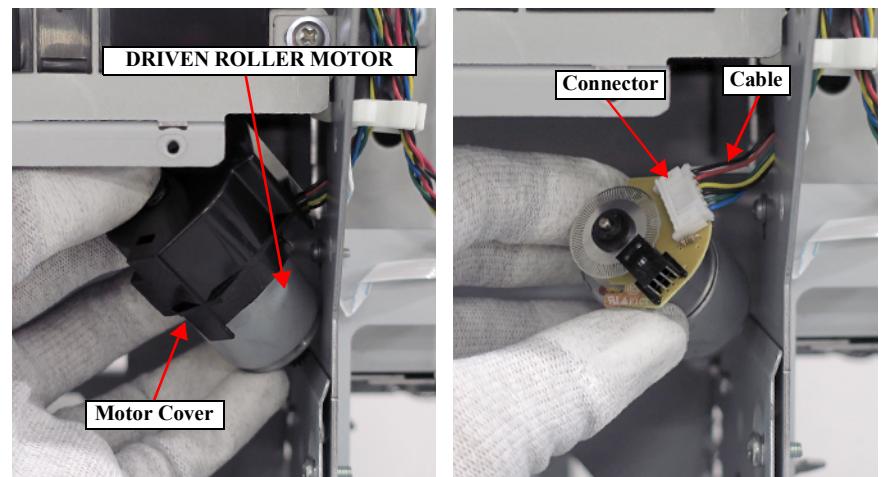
Removing the DRIVEN ROLLER MOTOR
